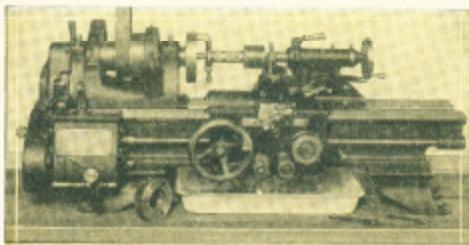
Making a Master Tap in a 9-inch Quick Change Gear Bench Lathe
